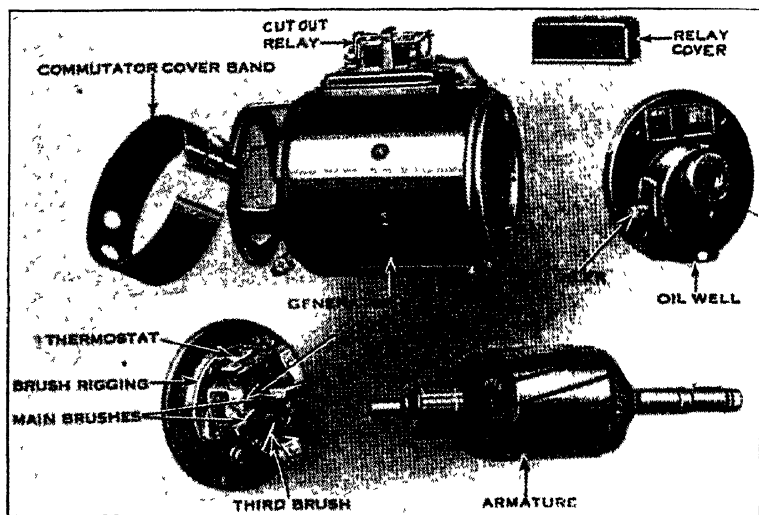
Component parts of a typical automobile generator. (Remy.)
